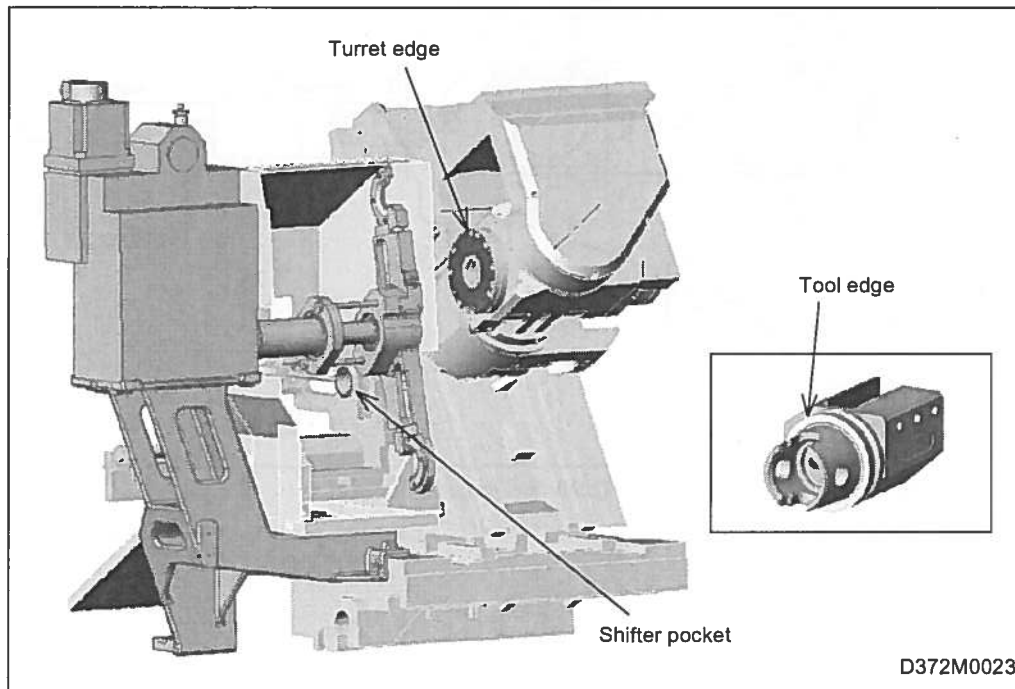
Cleaning the tool edge, the turret edge, and the magazine shifter pocket
